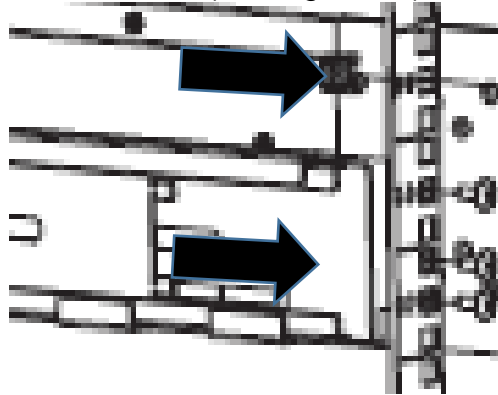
Install Cage Nuts in the Front Equipment Rail with Square Holes
